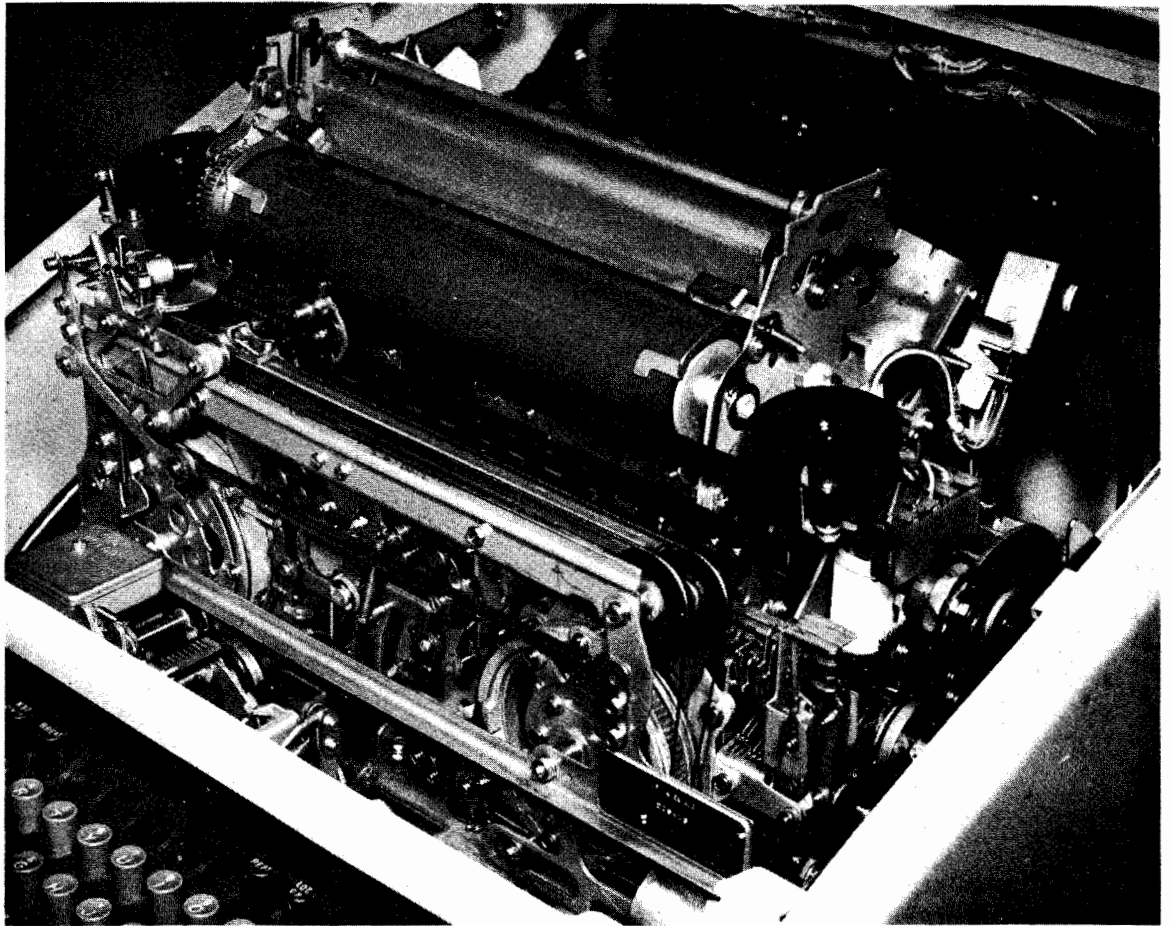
Internal View of TT-47/UG Showing Selector Magnet Assembly Before Modification
